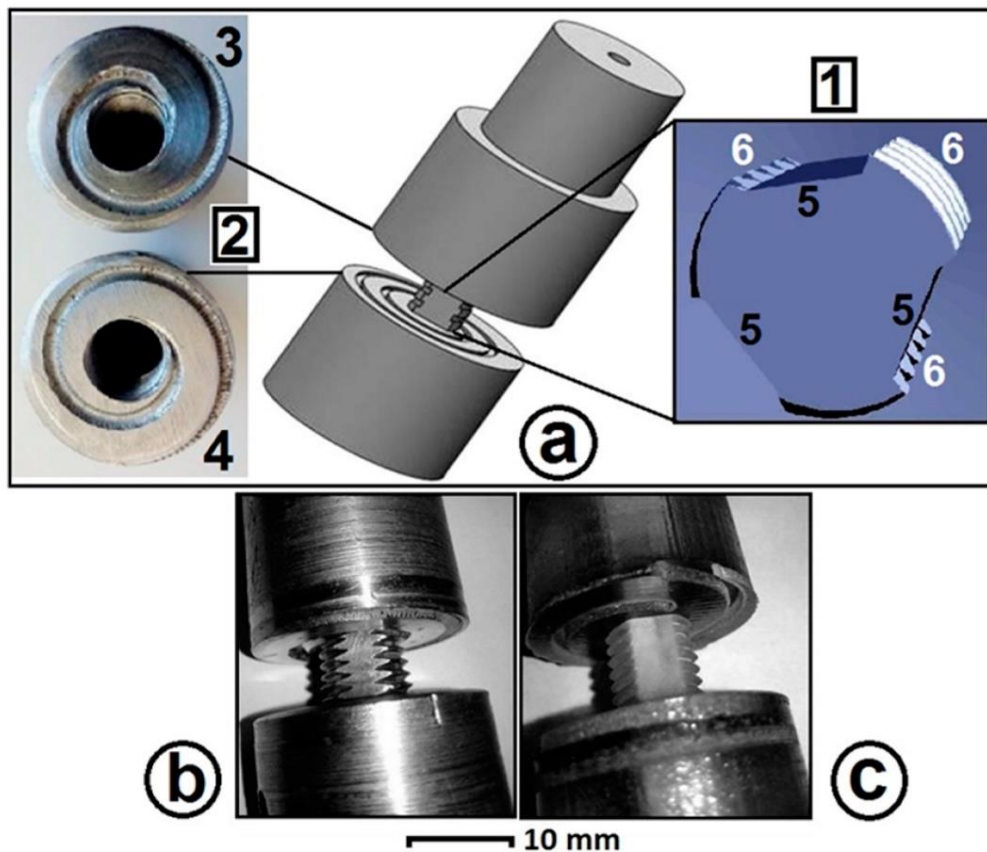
Schematic of the Bobbin Tool employed in experimental tests: (a) 3D model of the bobbin tool; 1-pin, 2-open end scrolls, 3-top shoulder, 4-bottom shoulder, 5-flats, 6-threads; (b) H13 steel bobbin tool for aluminium; (c) 3D printed bobbin tool for plasticine;
